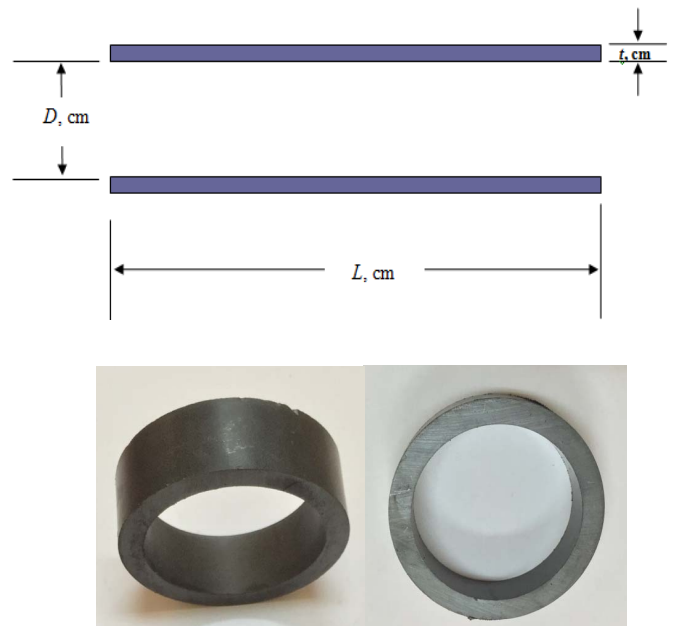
Cylindrical permanent magnetic tube from Cast Alnico magnet.
